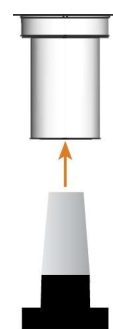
CLEANING THE INNER CONE OF THE SPINDLE
